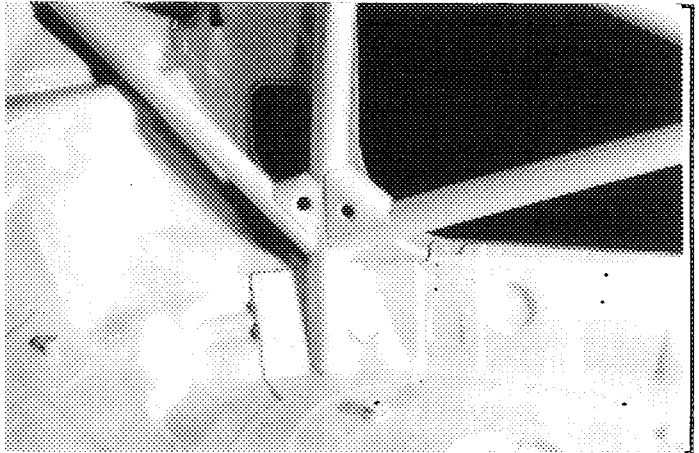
LATERAL BAR TO A-PILLAR
